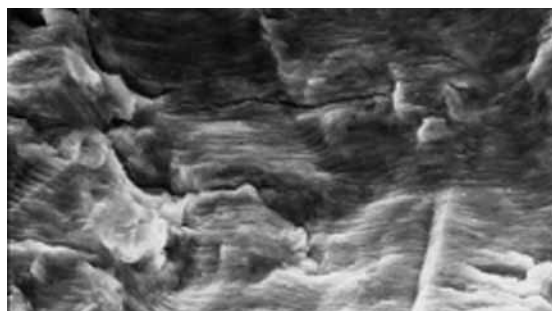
Striation formed by fatigue failure
